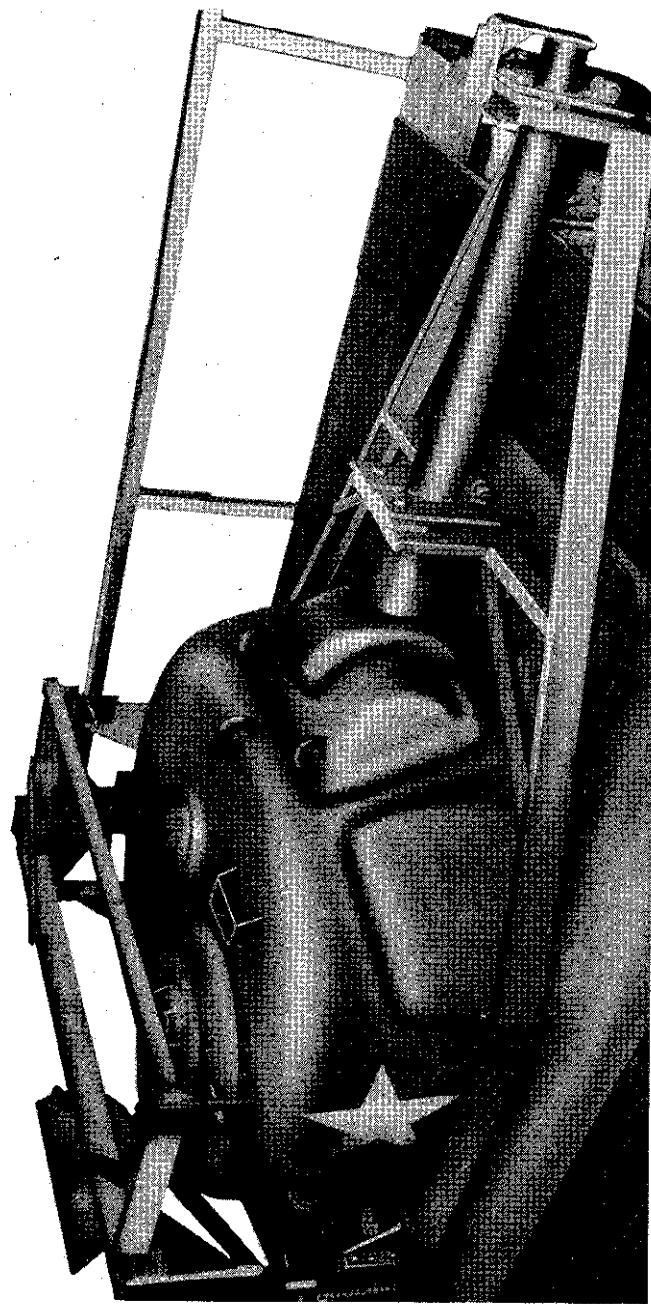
View of Tank Turret Showing Parts Removedb. Welding of Tank Attachments.
